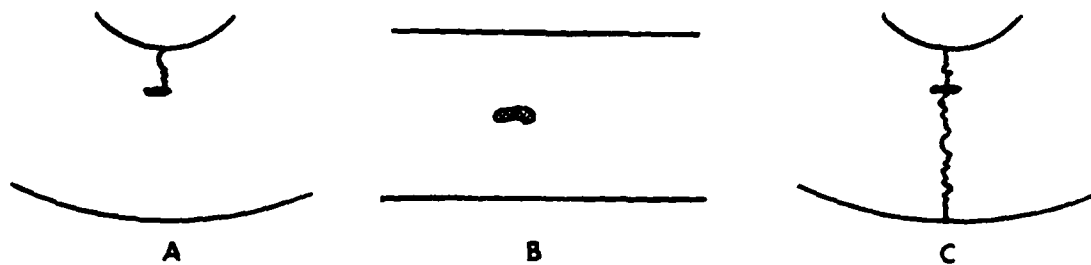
Bearing Spalling and Rapid Fracture. A) Spalling initiates from a subsurface flaw or crack and propagates to the inner surface. B) The spall itself is a chip on the raceway surface. C) Rapid fracture initiates at a subsurface flaw or crack and propagates in two directions.
